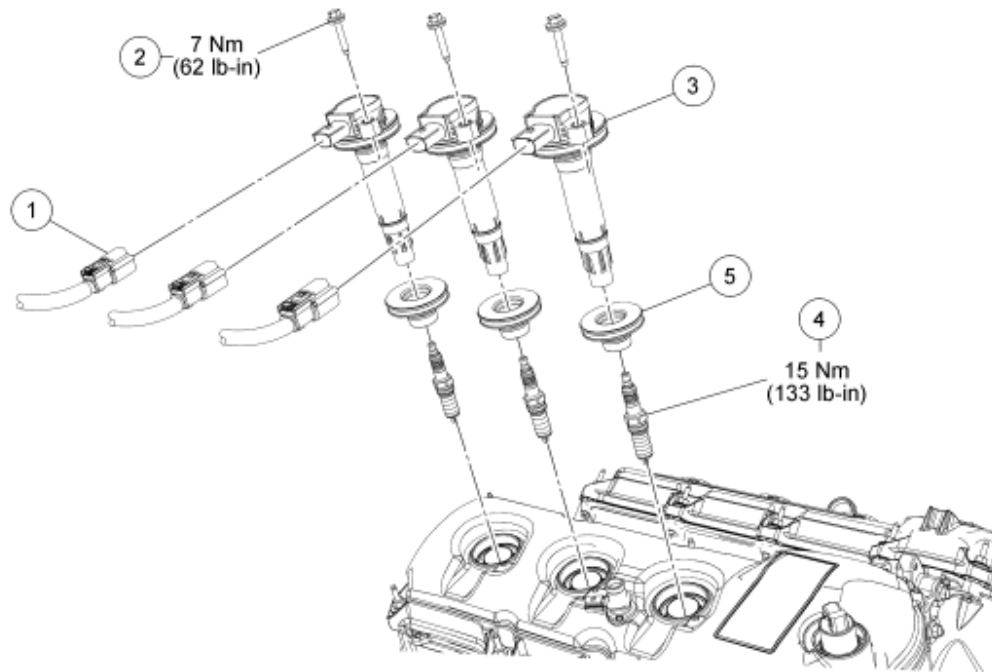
Exploded View Of Engine Ignition Components With Torque Specifications - LH Side
